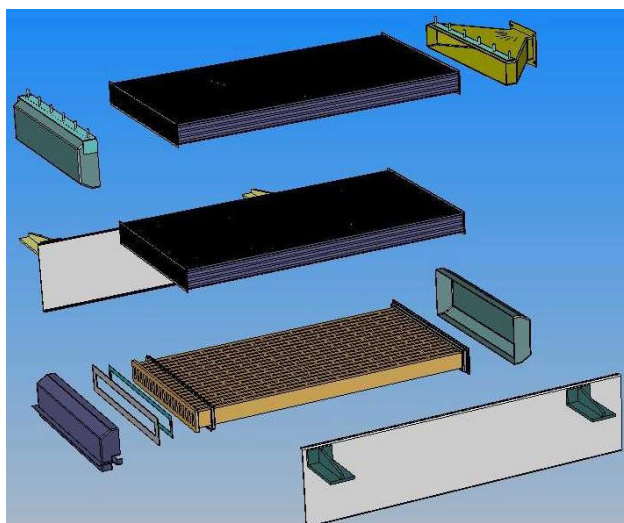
Exploded View of the Hybrid Heat Exchanger Concept
